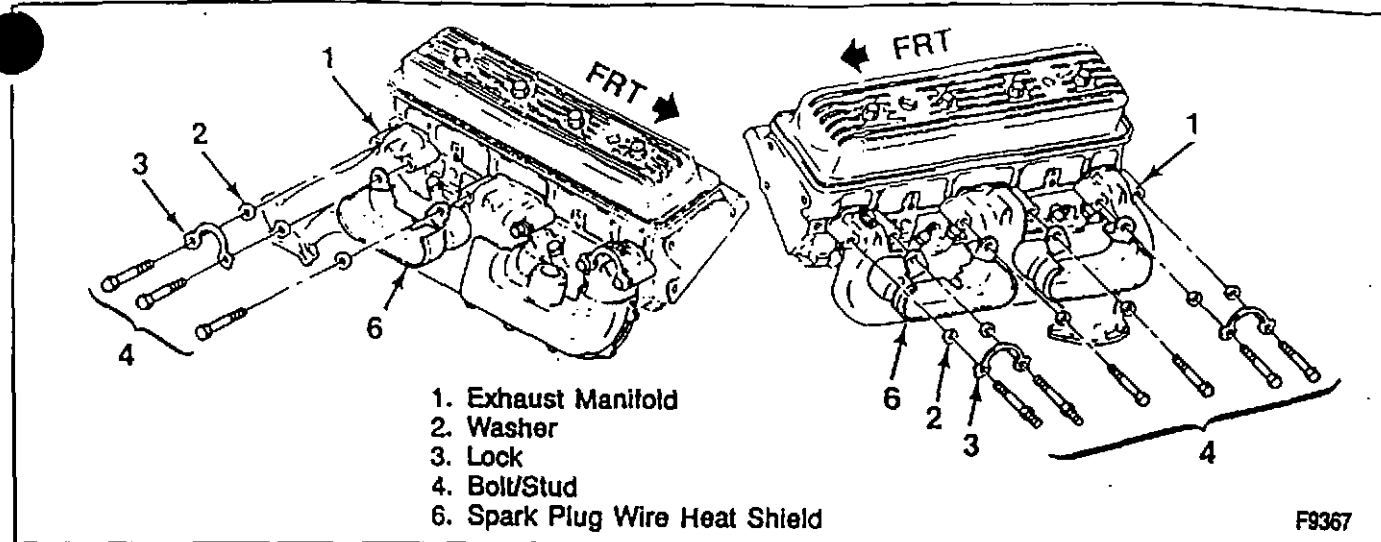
Exhaust Manifold (5.0L and 5.7L Engines)
